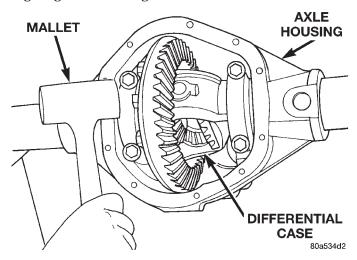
Seat Pinion Gear Side Differential Dummy Side Bearing
